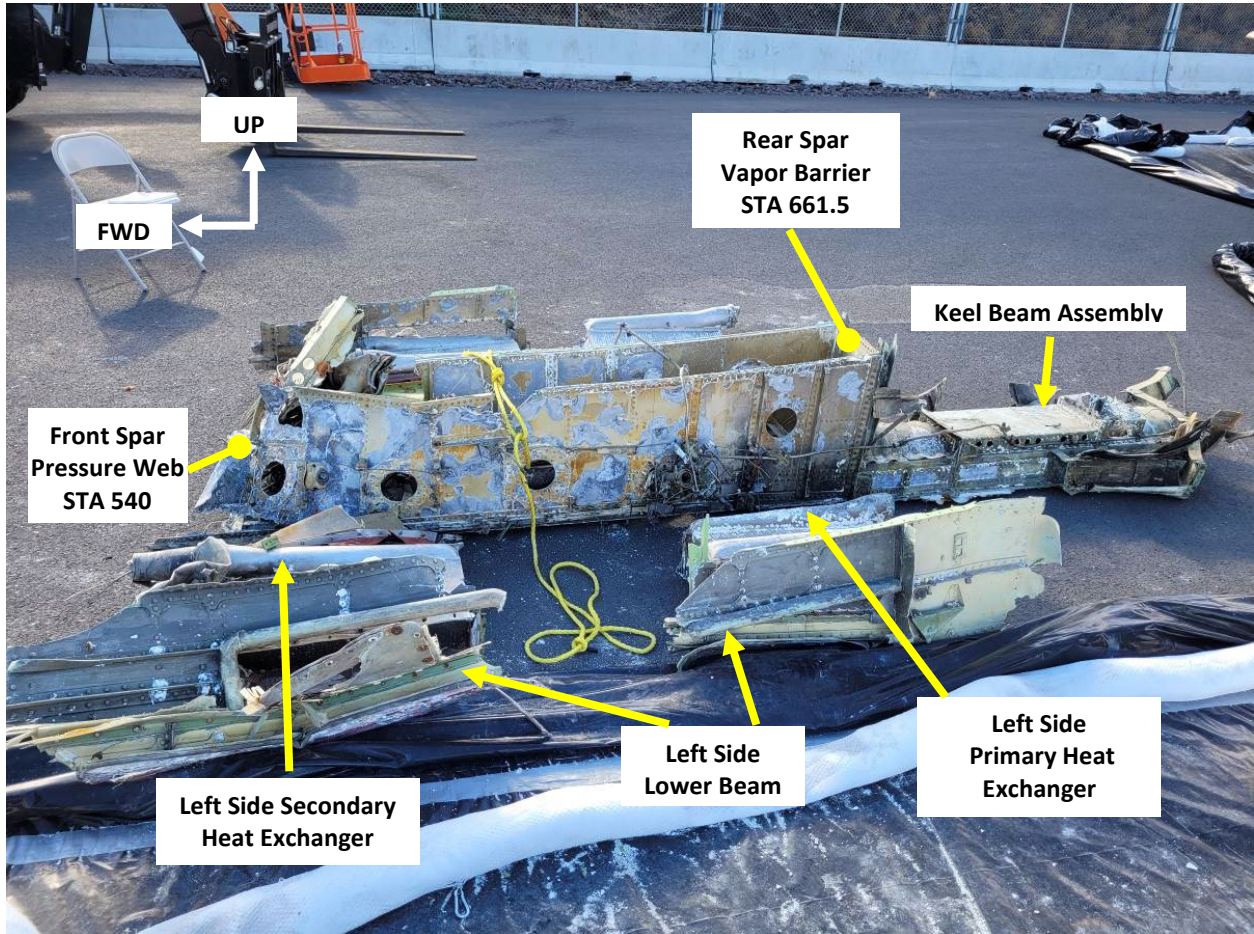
Left side view of Keel Beam Assembly, looking right (Boeing photo)
